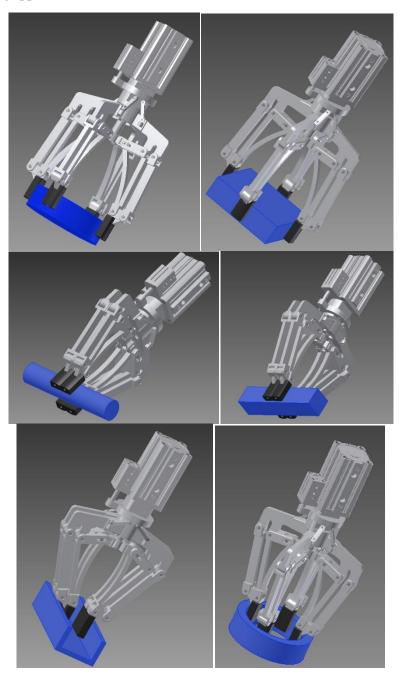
Types of workpiece manipulated with the help of gripper.
